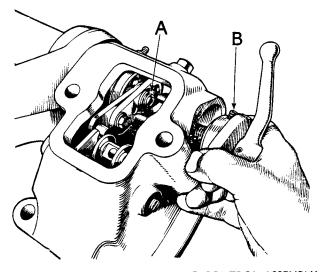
REMOVING THE OVERRIDE CONTROL ASSEMBLY A. Circlip B. Detent Spring
